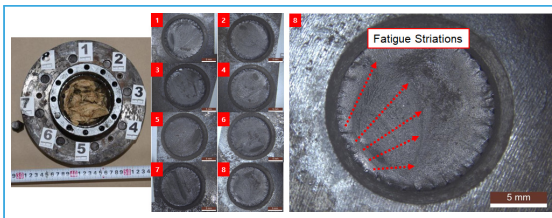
Fracture surface inspection and fatigue beach mark identification on #8
